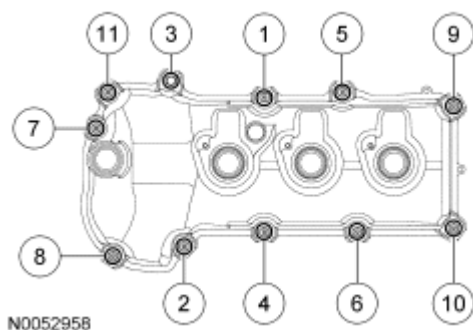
Installing RH Valve Cover Stud Bolts In Sequence
